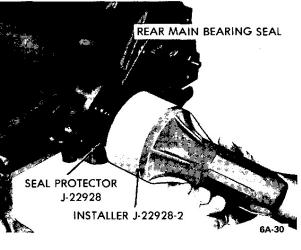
A-30 Installing Rear Main Bearing Oil Seal
